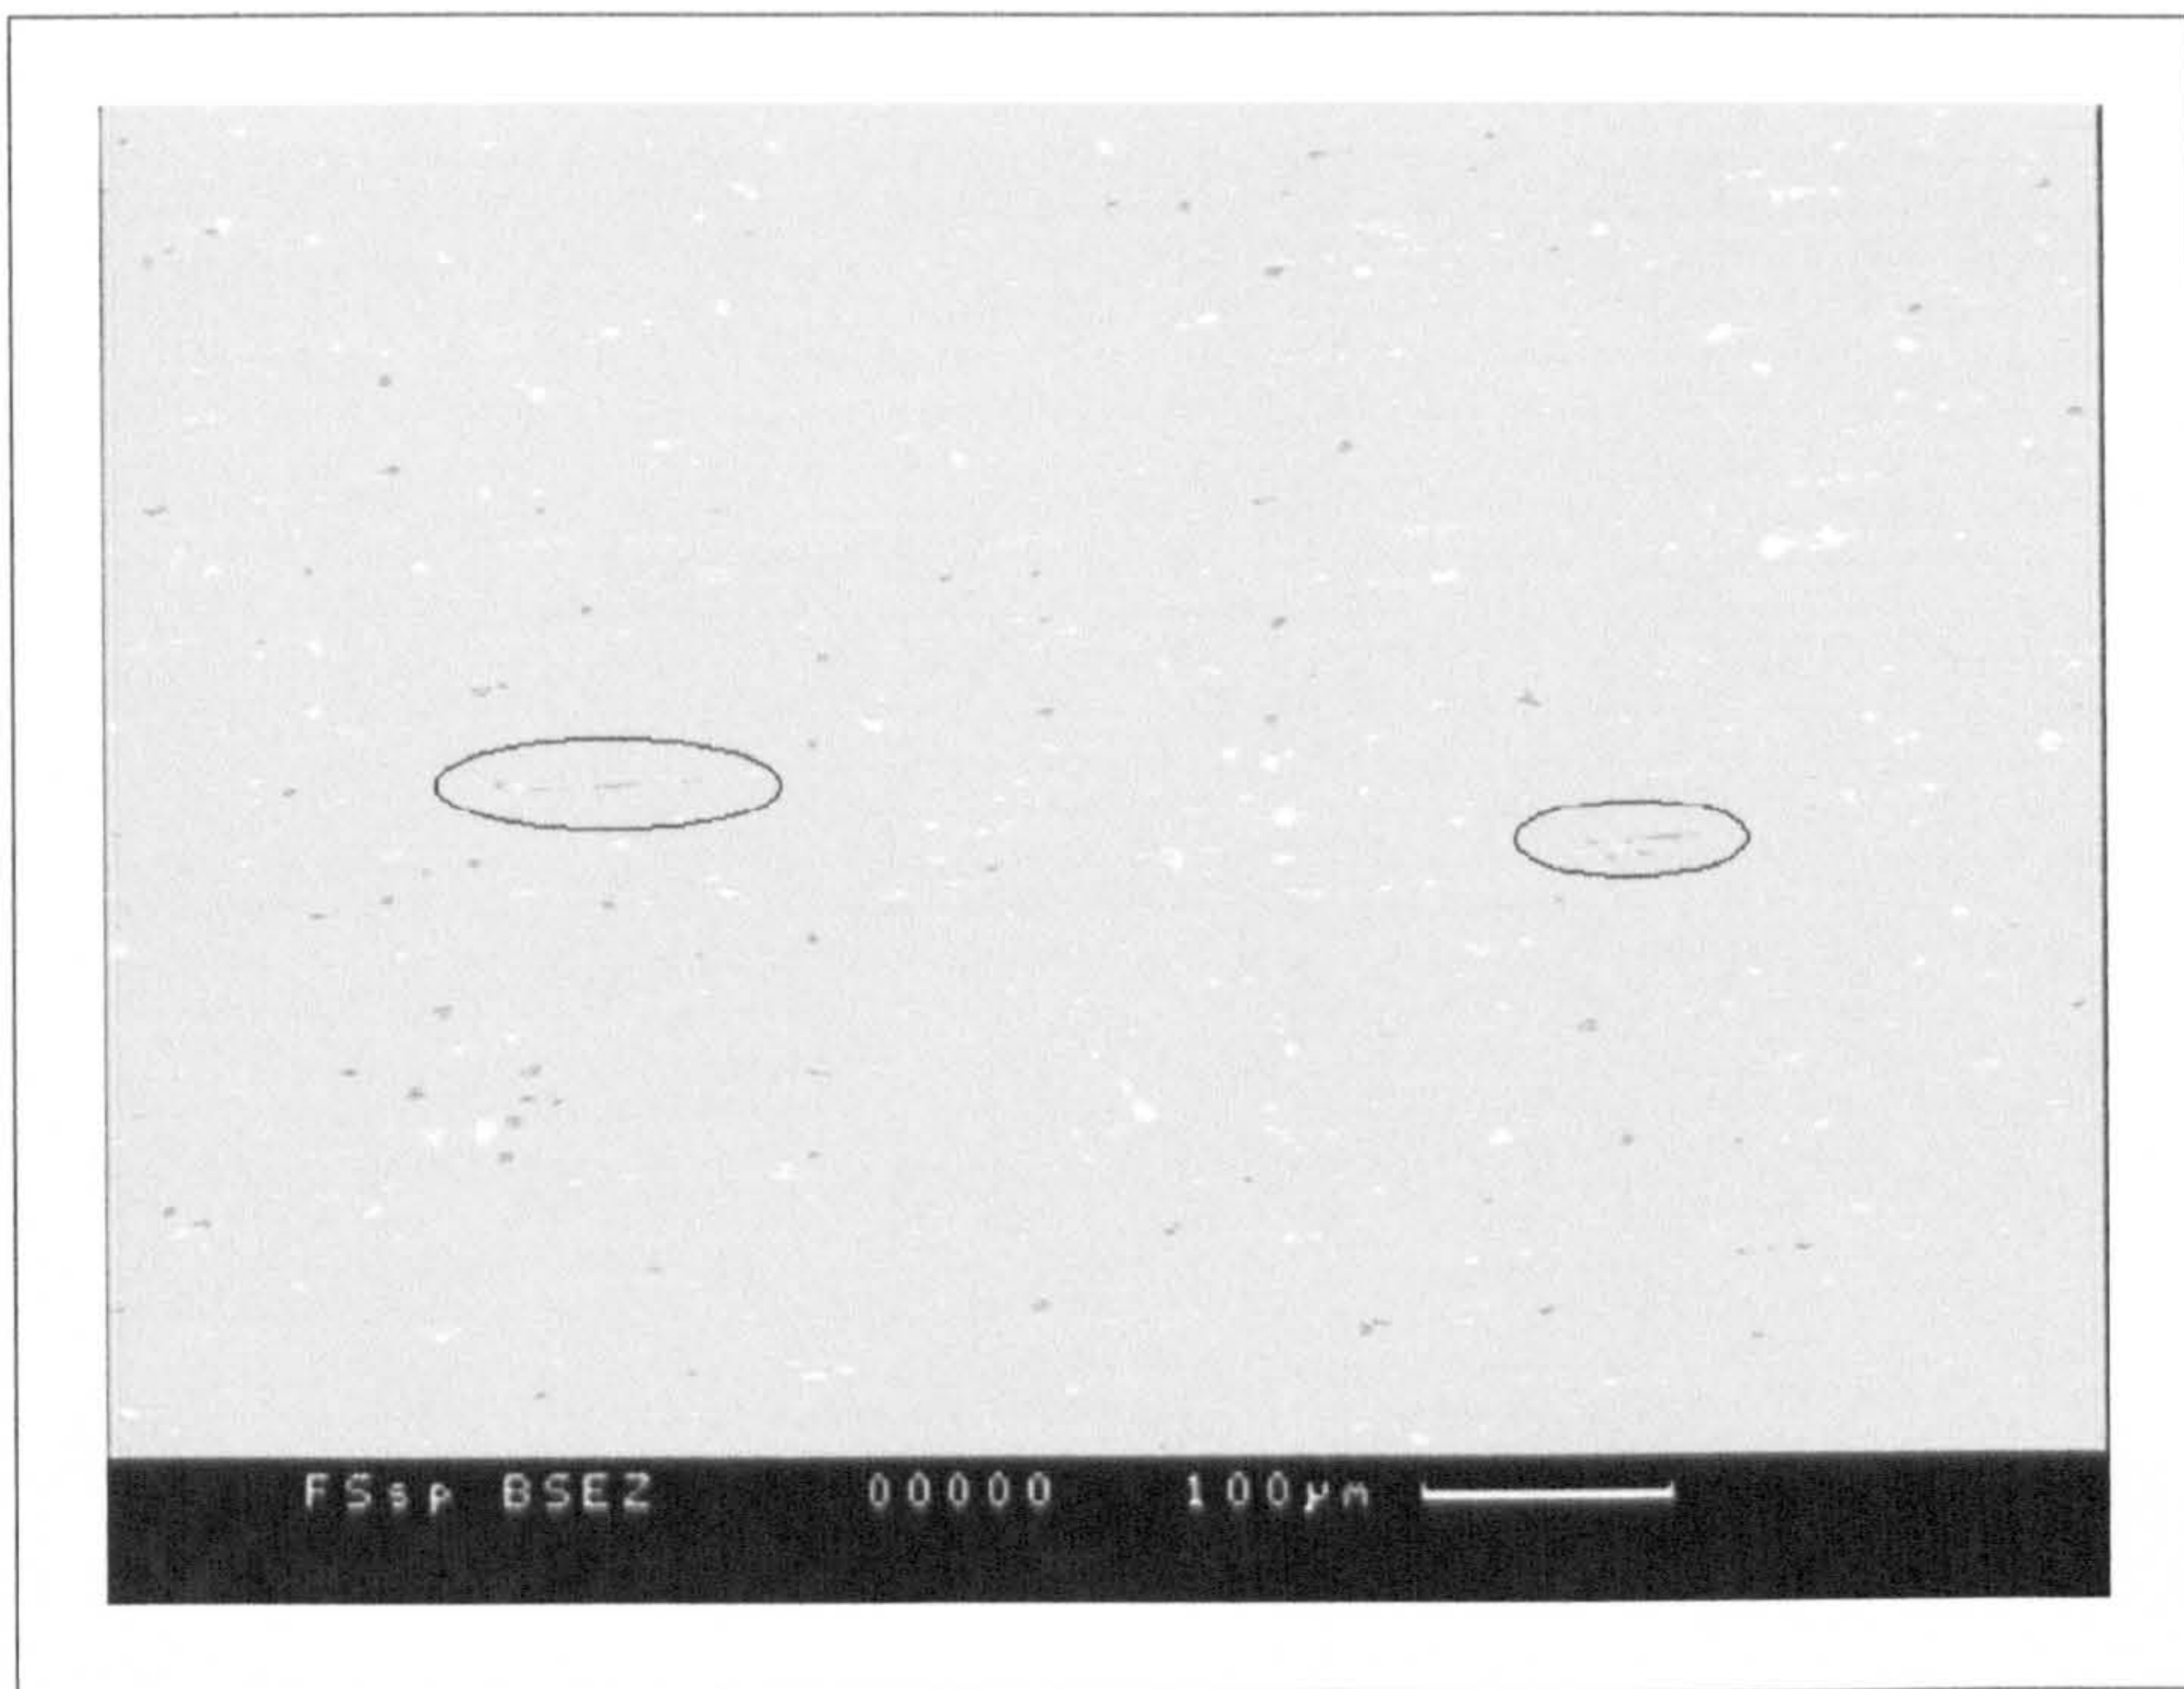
Partial fusion defects in the weld nugget, outlined, TS plane.
